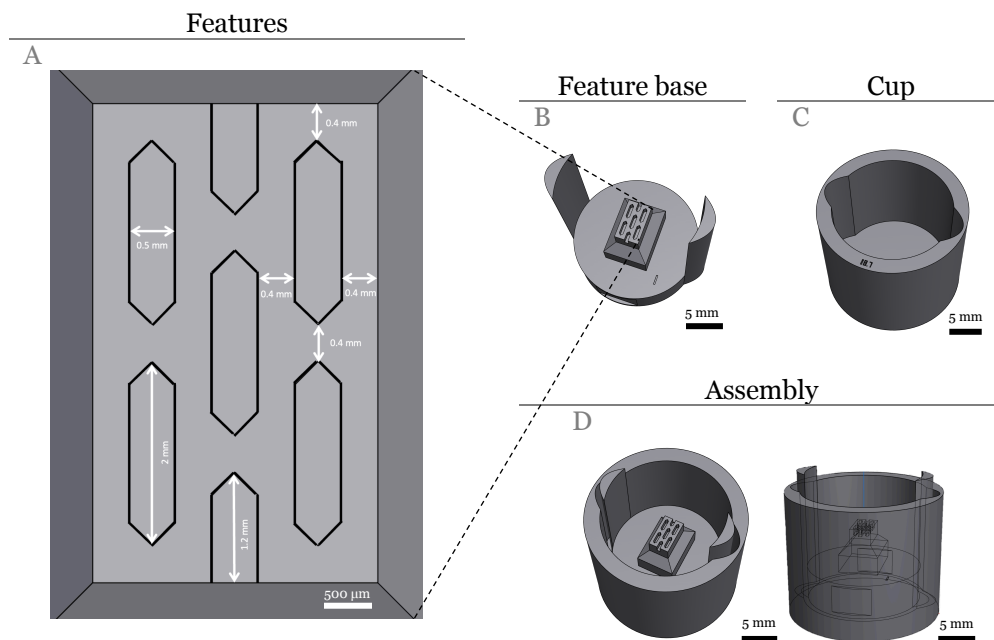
Mould design incusing microfeature design of 2 mm length and 0.5 mm width (A), mould feature base (B) and mould cup (C). The assembly of the feature base and the cup (D).
